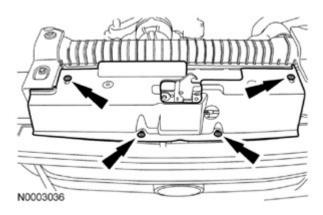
Locating Retainers And Shield Courtesy of FORD MOTOR CO.
